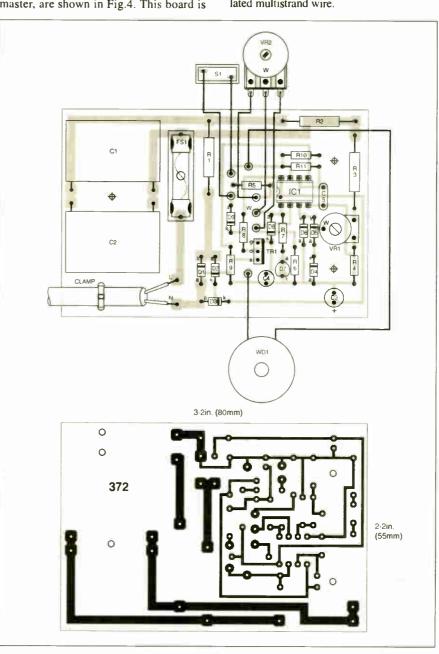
Printed circuit board topside component layout, wiring and full-size copper foil master for the Transient Tracker.
